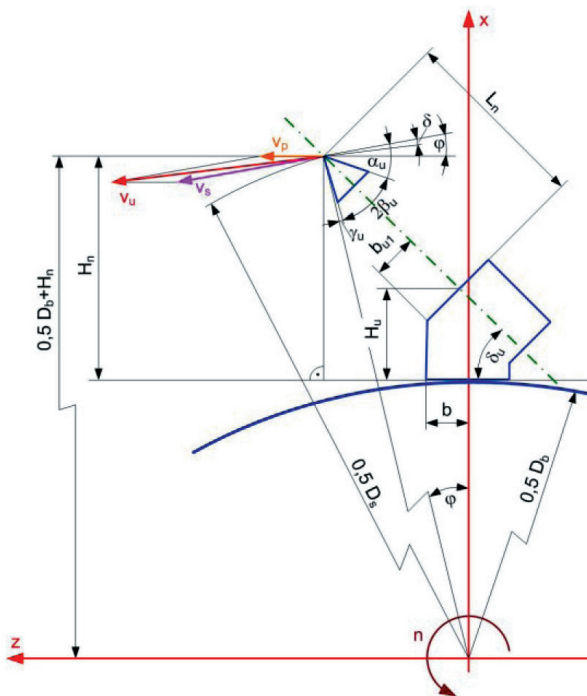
Parameters of tool holder setup and tangential-rotary pick adjustment on cutting head [6]
